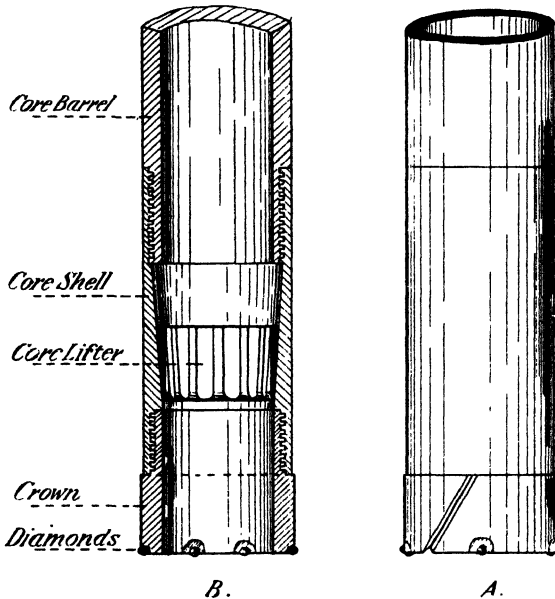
Diamond Crown Drill, Working Parts. A. Elevation ; B. Section.
